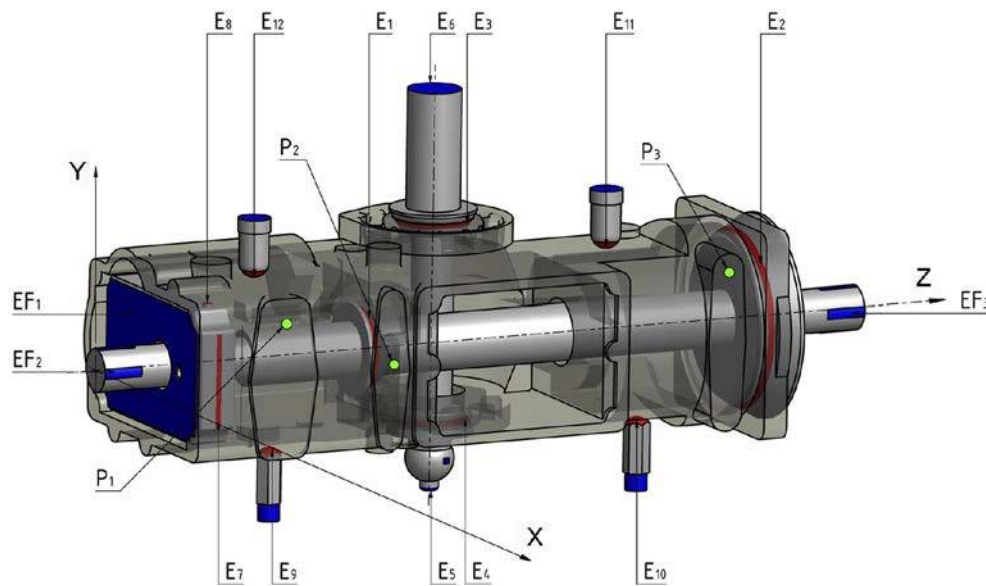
Workpiece with the marked locating and clamping zones – boundary conditions
